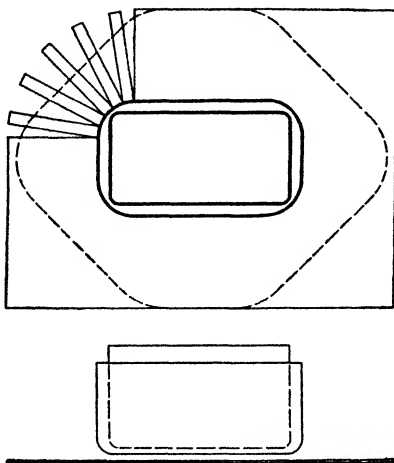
A blank and two steps in drawing for a rectangular shell, illustrating the corner displacement.
